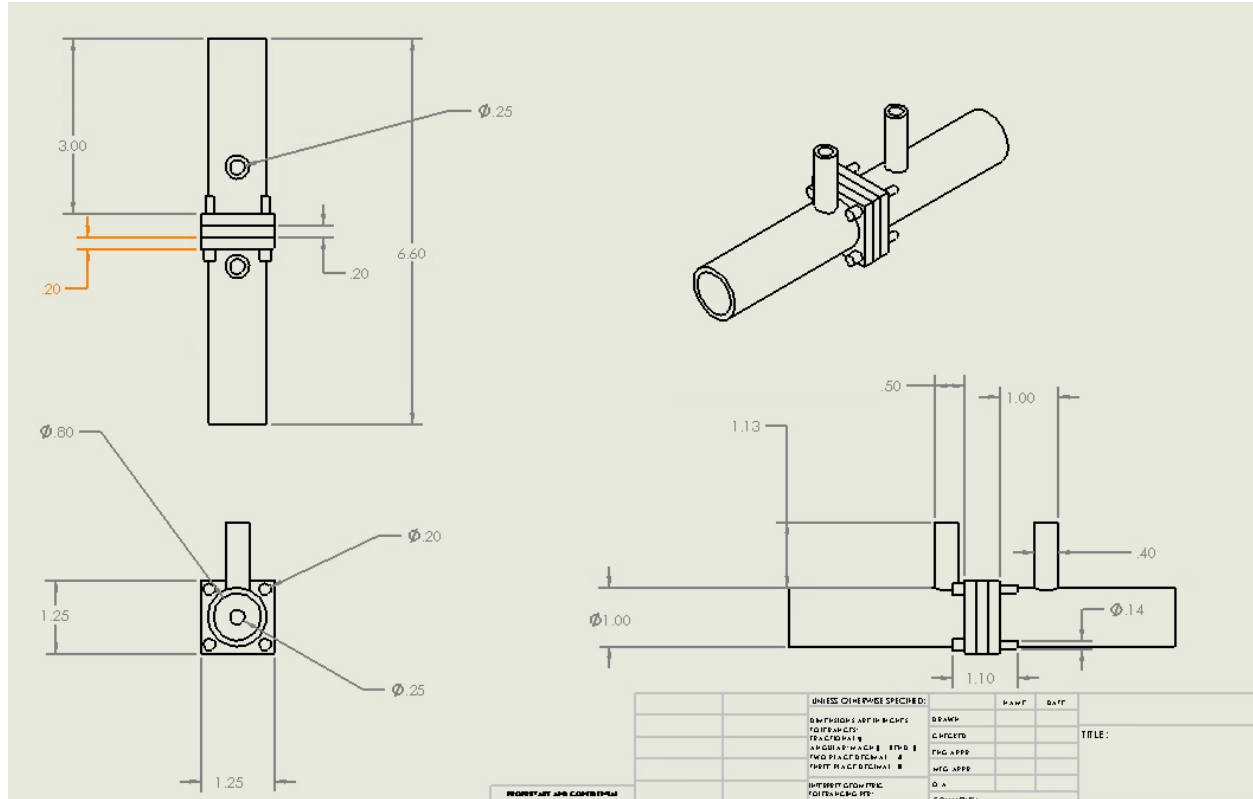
Engineering Drawing for the assembly of parts 2,3,4 and the pins
